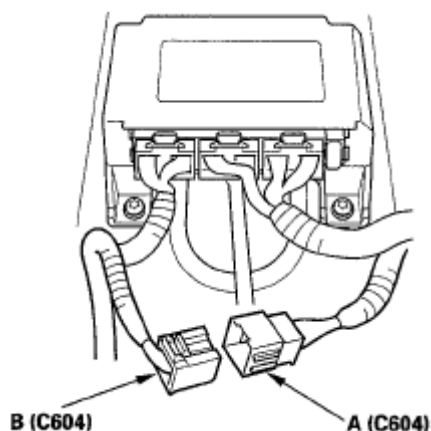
Identifying Left Side Wire Harness 16P Connector C604 And Right Side Wire Harness C604 - '05 Model
